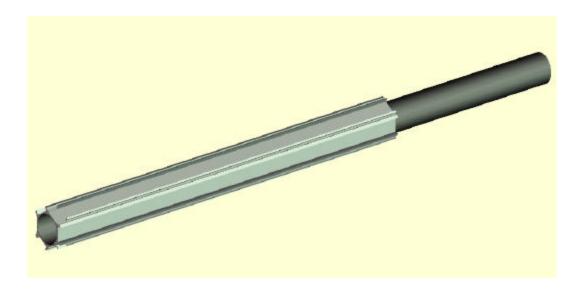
Machined graphite foam on inner carbon/epoxy shell
